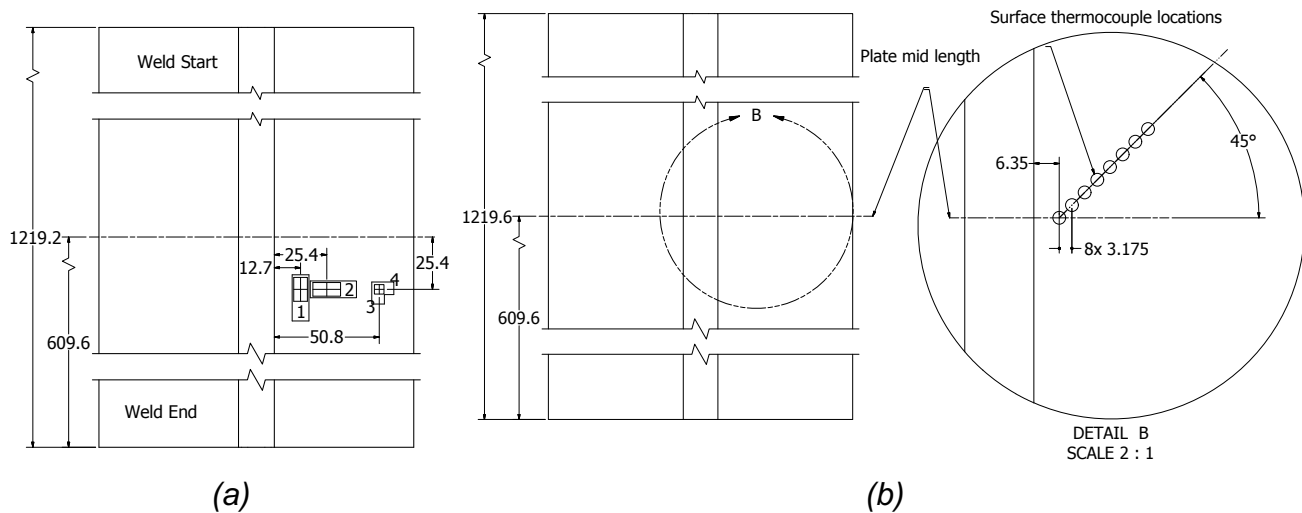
Sensor locations for measurements during welding: (a) strain gages (1 and 3 are axial, 2 and 4 transverse), and (b) thermocouples. Dimensions in mm
